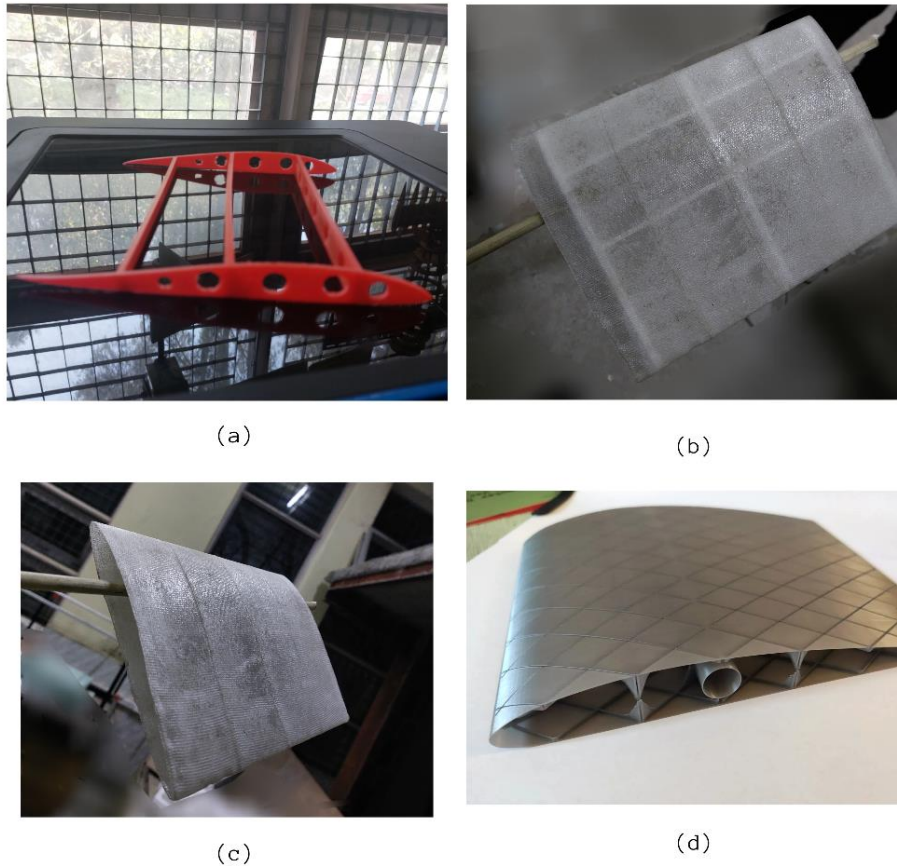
(a): Modular frame structure fabricated by 3D printing TPU
